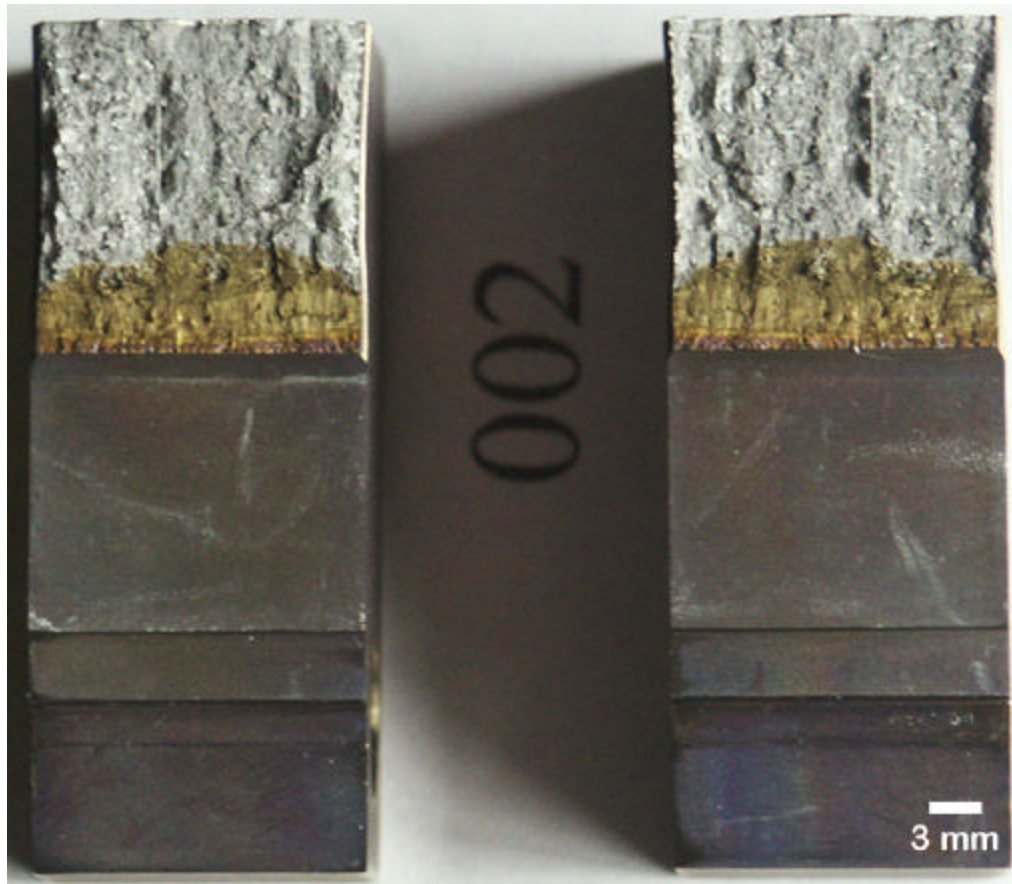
Typical compact tension specimen fracture surfaces from Ti5111 matching filler metal weld. Note increased aspect of brittle fracture as compared to the base material.
